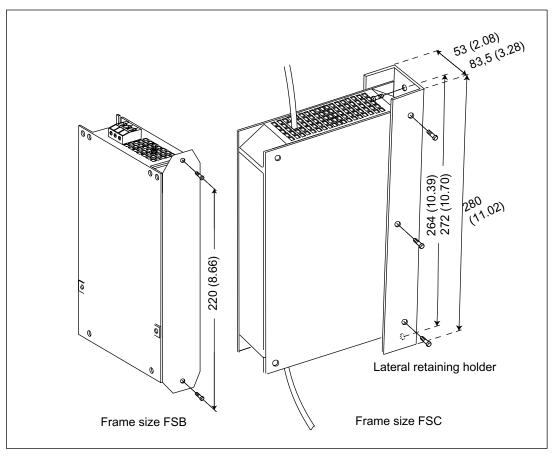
Side mounting: Line reactors, frame sizes FSB and FSC
